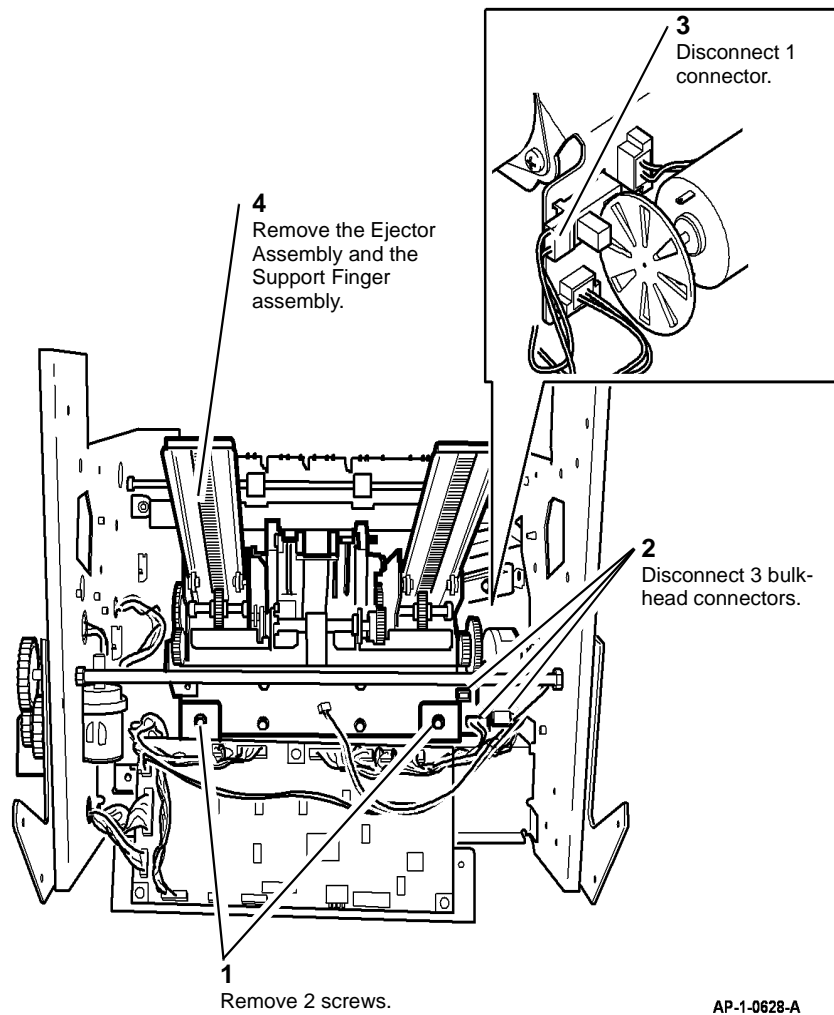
Removing the Ejector Assembly and Support Finger Assembly
